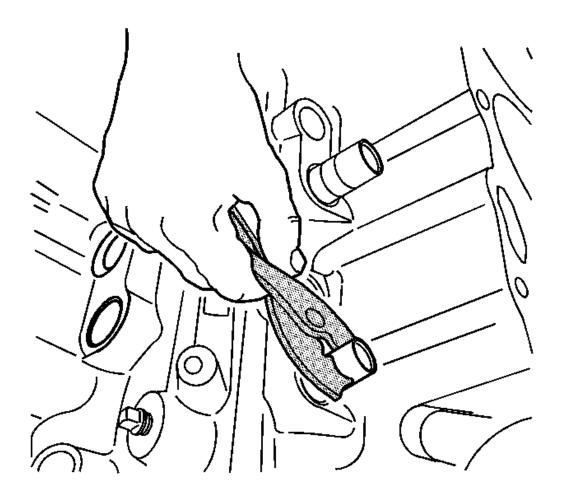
Removing Valve Lifter Using J 3049-A Courtesy of GENERAL MOTORS CORP.
